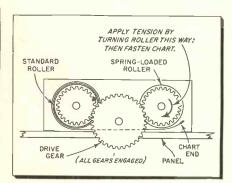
Chart is placed on unmodified roller and spring-loaded gear is given one turn for each five feet of roll length. Tension is in a direction to tighten roll chart.
